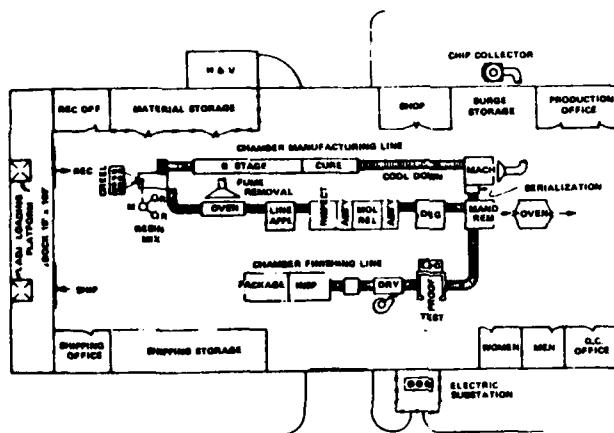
Production Line Layout for the One-Piece Rocket Motor Case Design
